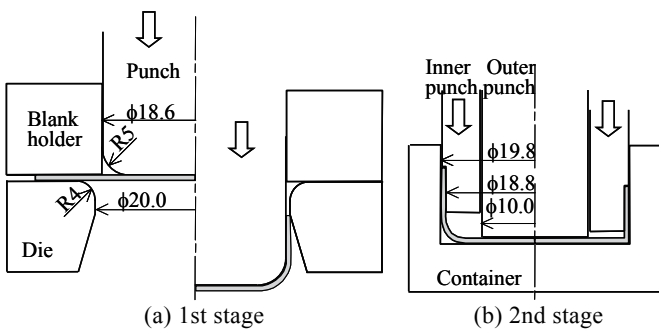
2-stages stamping for forming magnesium alloy cup having small corner radius
